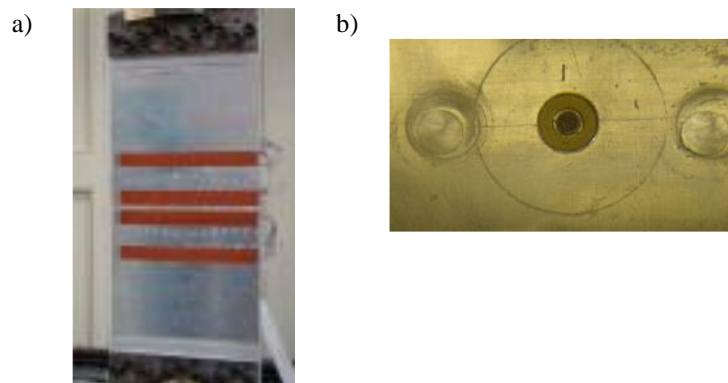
Aluminium lap joint used for crack detection investigations: (a) general view; (b) fatigue crack close-up in the centre of the specimen
